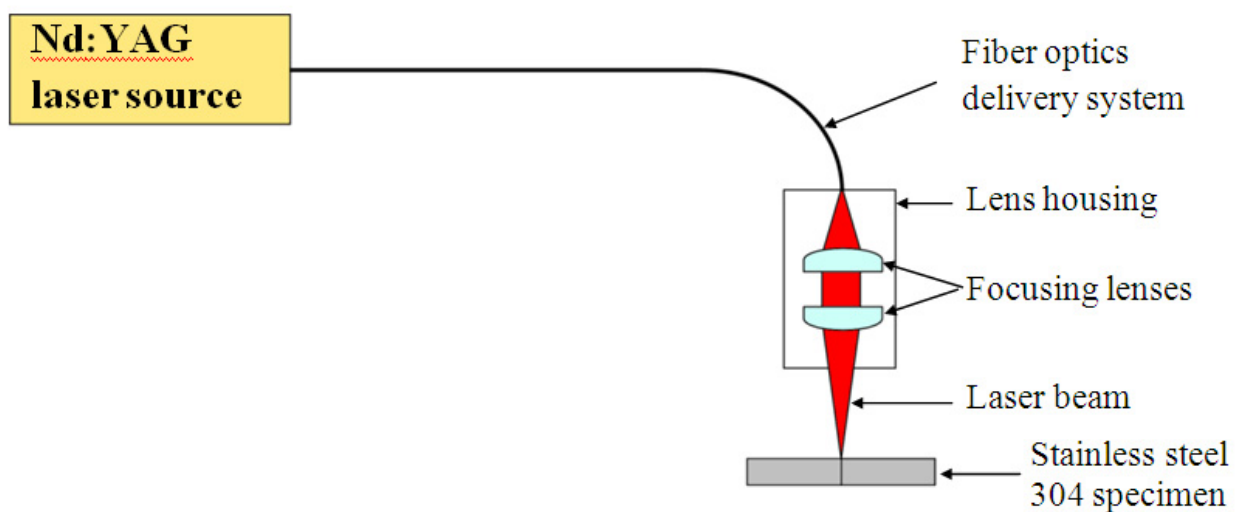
Nd:YAG laser experimental setup to produce a spot weld on stainless steel 304 specimen.
